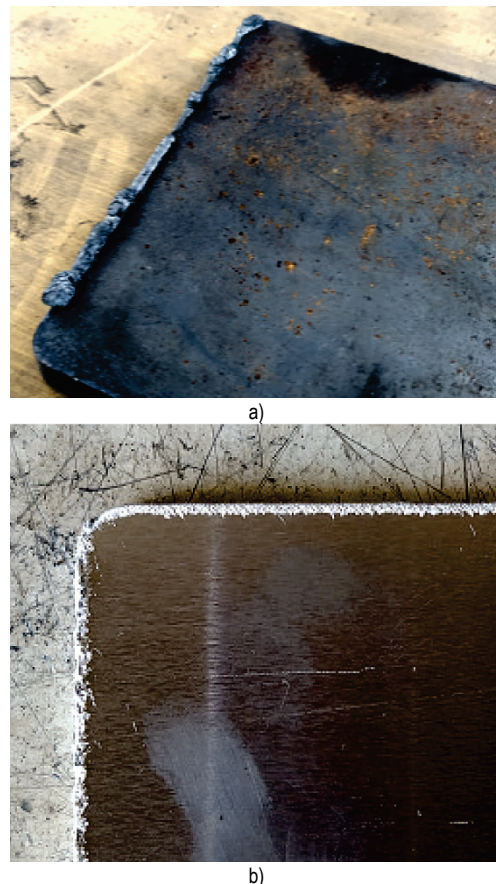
Common issues during machining process using suboptimal settings: a) The accumulation of slag on the underside of the cut specimen due to insufficient cutting speed, b) Slag on the upper side of the workpiece due to excessive cutting speed.
